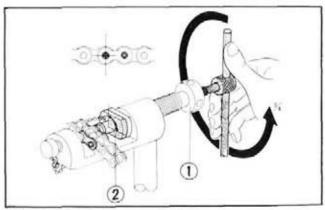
① Pressure bolt A ② Wedge pin
